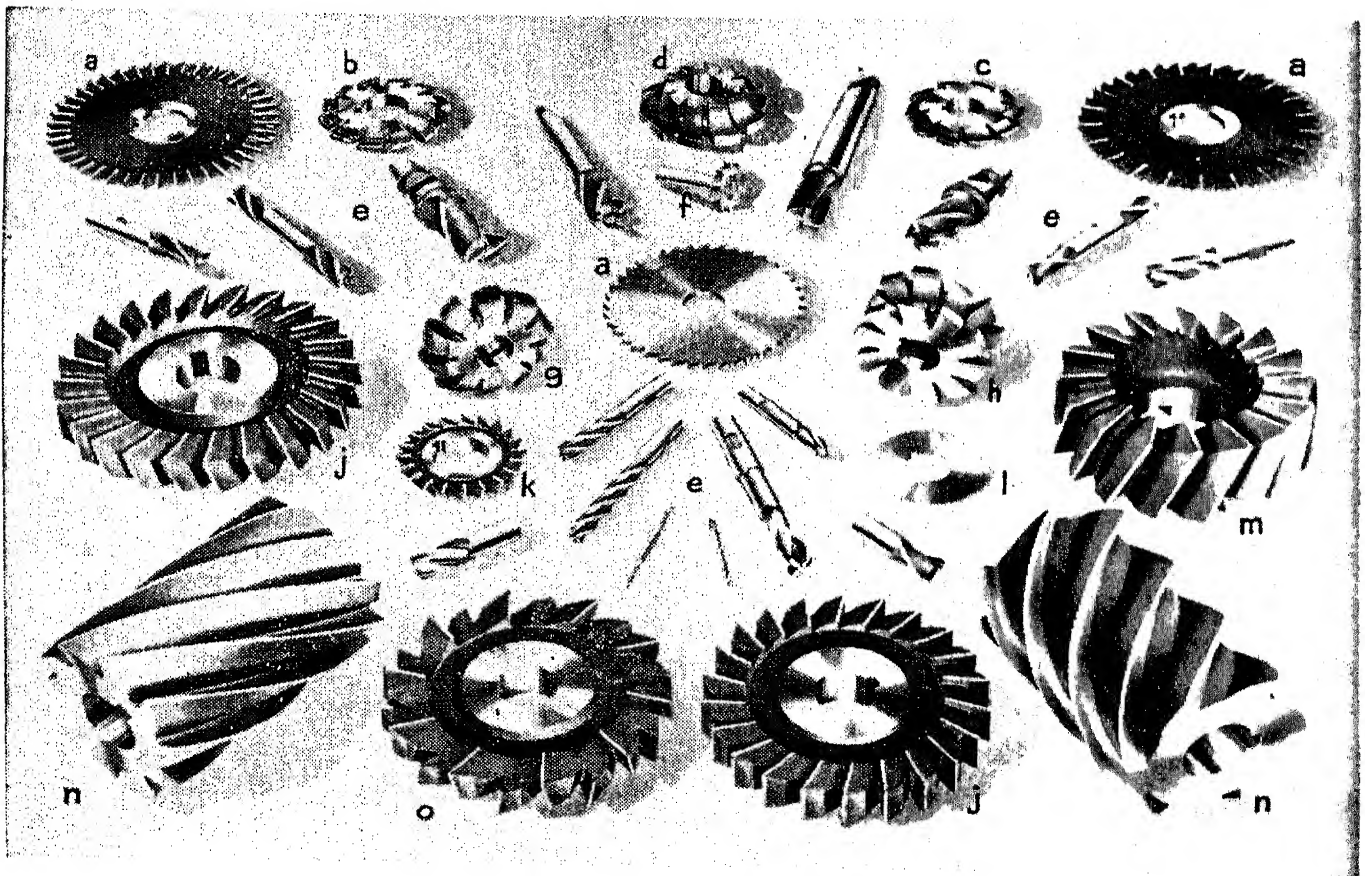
Principal types of standard milling cutters. (Courtesy Brown and Sharpe Mfg. Co.) a. Metal slitting saws. b. Stocking cutter for involute spur gears. c. Involute spur gear cutter. d. Corner rounding cutter. e. End milling cutters. f. Woodruff keyseat cutters. g. Convex cutter. h. Concave cutter. j. Side milling cutters. k. Angular cutter. l. Screw slotting cutter. m. Shell end mill. n. Plain milling cutters. o. Staggered tooth milling cutter.
